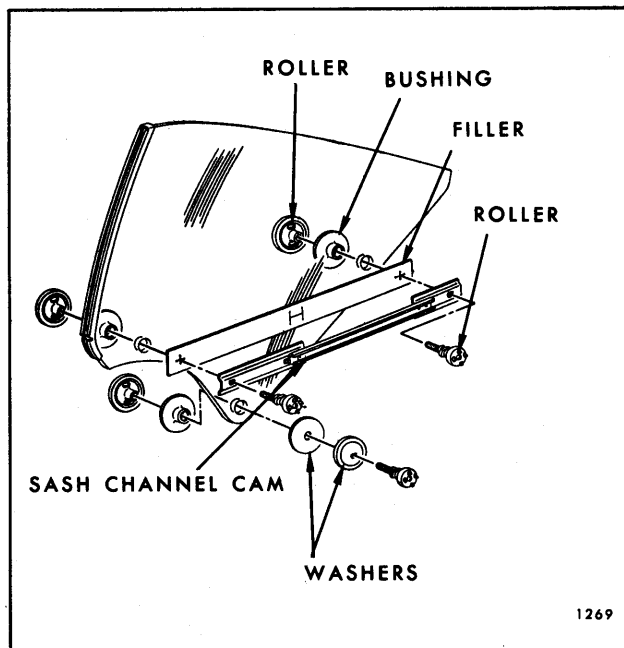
Rear Quarter Window Assembly - "Z-37" Styles
